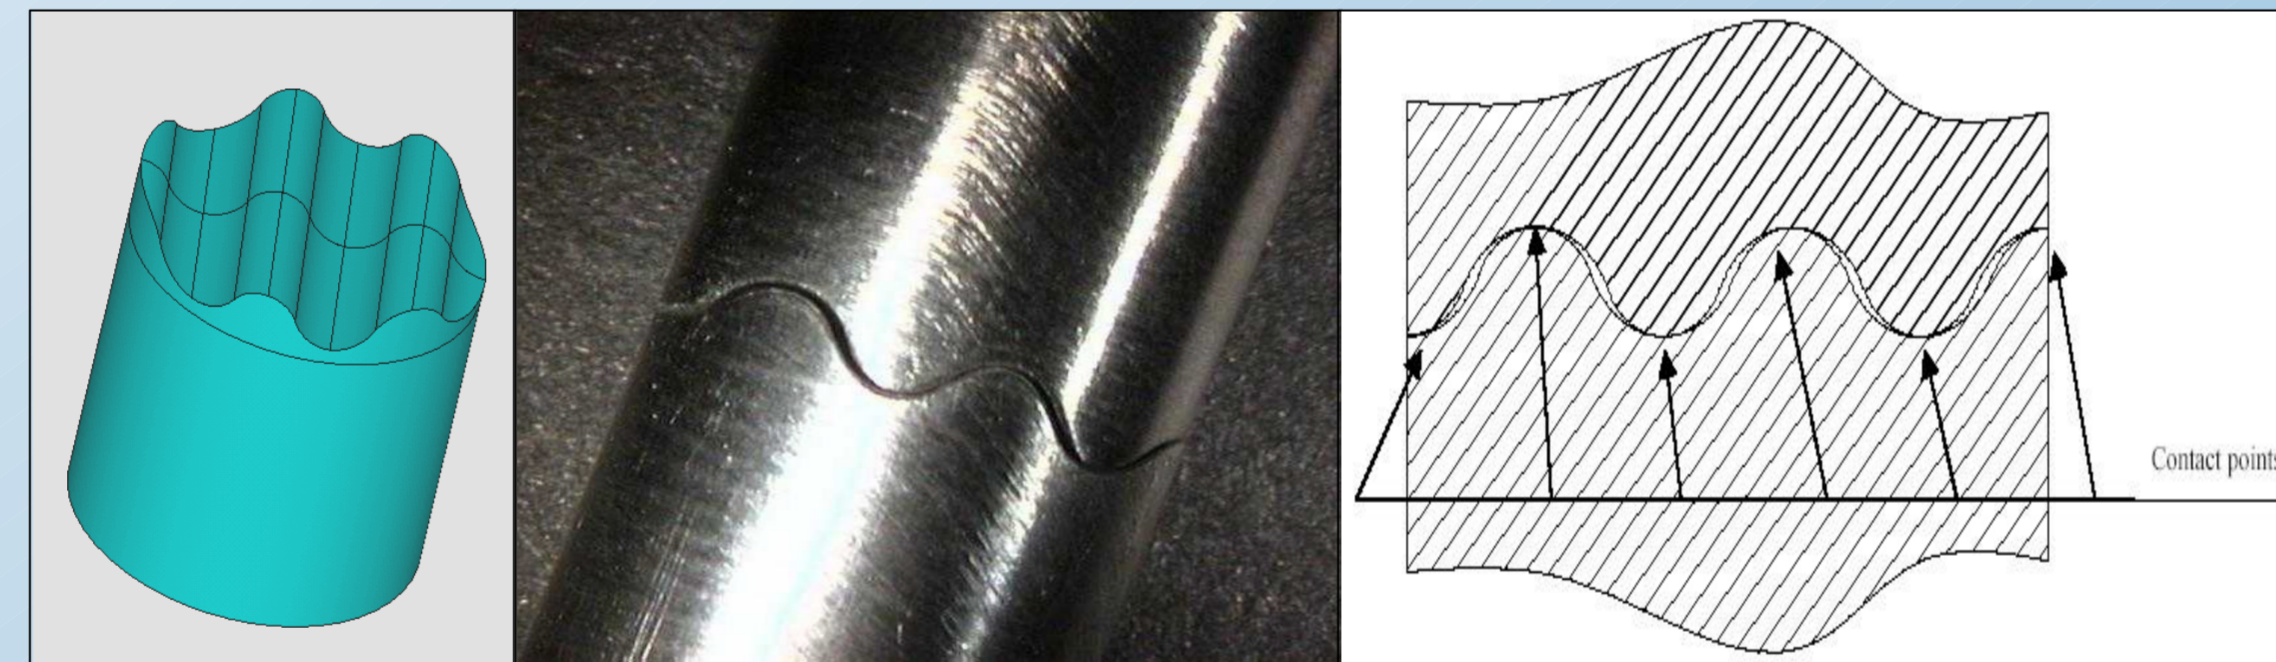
a) Multipoint Contact profile; b) Welding Contact spots and geometry.
